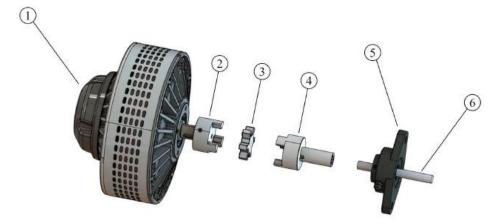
An exploded view of the main drivetrain components in the upper unit; left to right:
